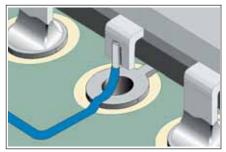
Acceptable Wire soldered to clipped lead on component side. +
